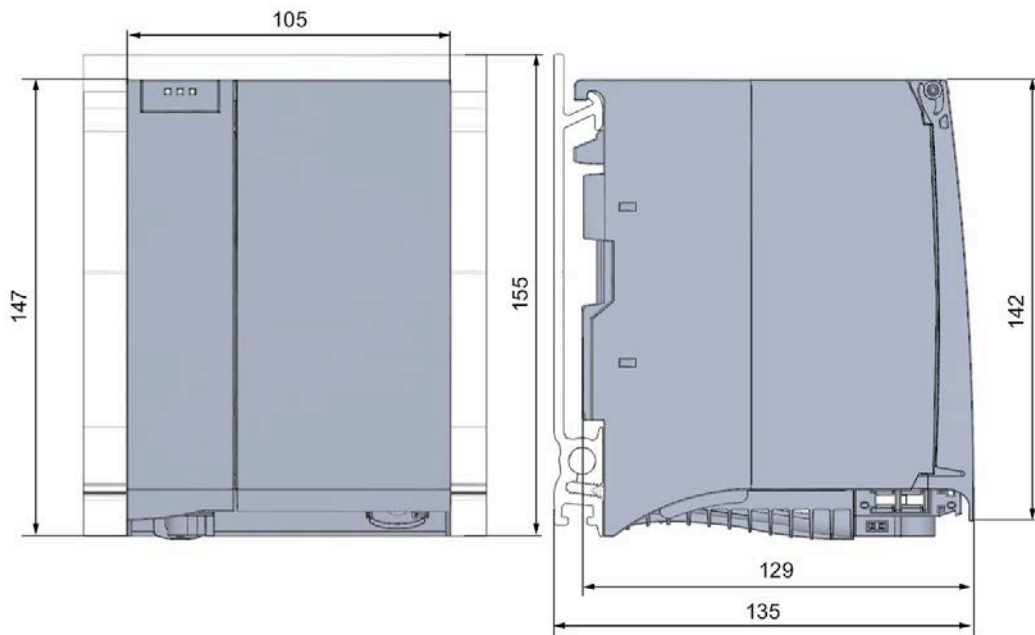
Dimensional drawing of the PS 60W 24/48/60VDC HF module
